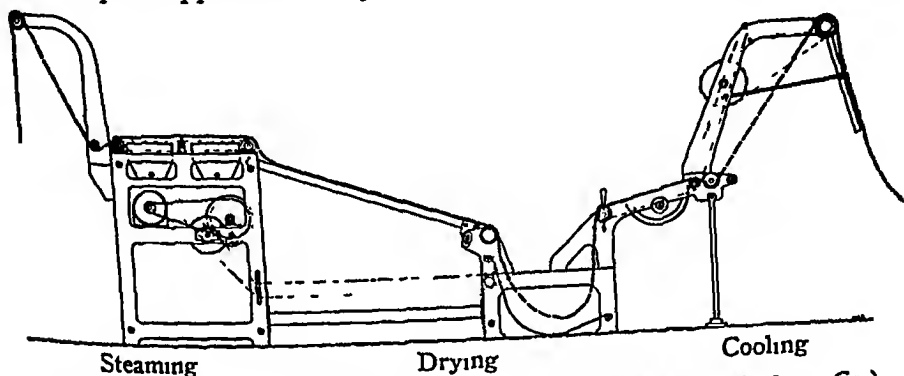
Full-shrink finishing machine (Courtesy Mawaco Machine Co)
